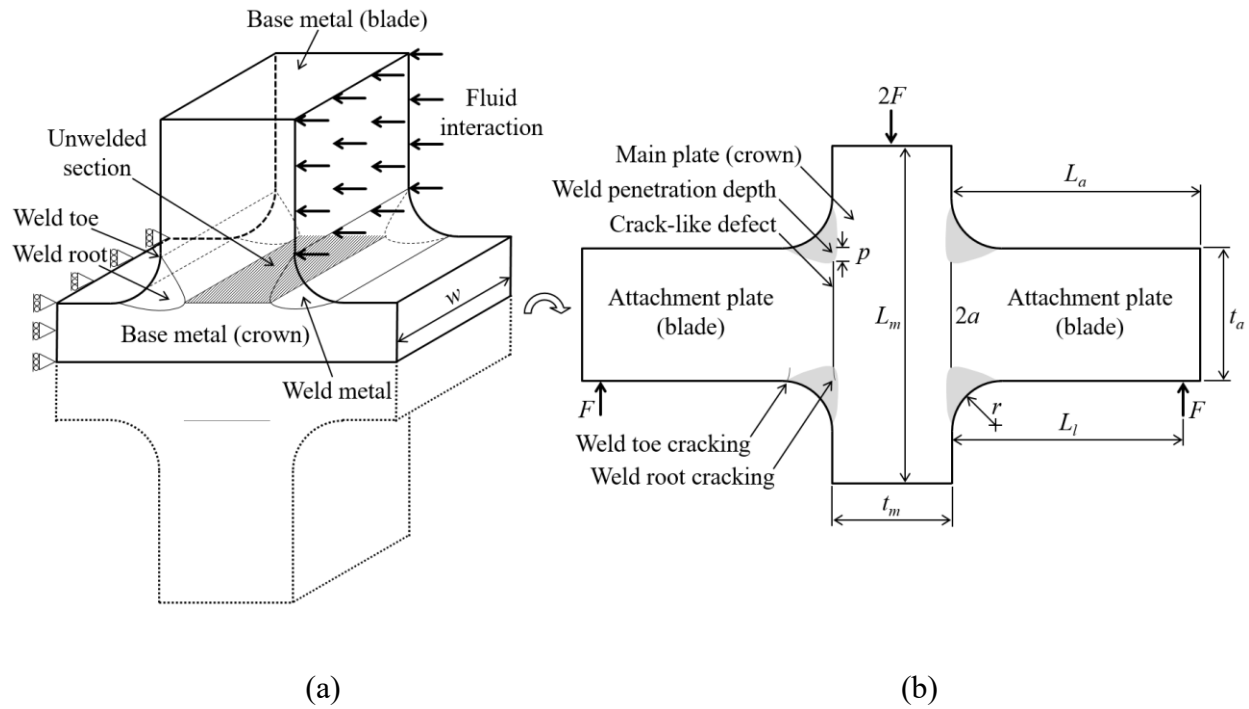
Schematic view of the analogous load-carrying cruciform fillet welded joint to the partially penetrated welded joint in the turbine runners
